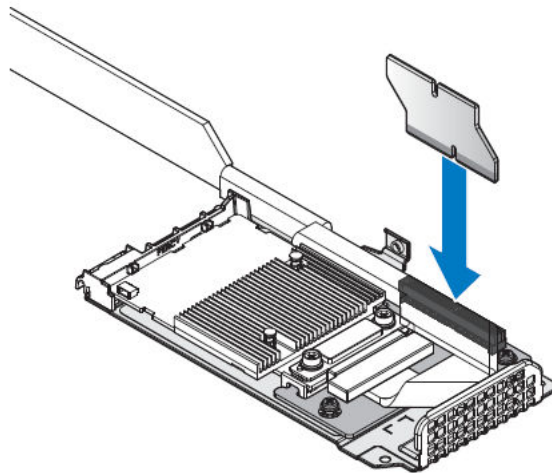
Assembling the Mini PERC card and cable on the bracket
